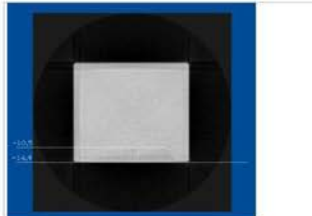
CT-slice #29 (z=110.18 mm) of test block P28 (N 220 AD U TS 3), crack depth: 4.4 mm (= 2 pixel = 0.24 mm), 14.9% of weld thickness
